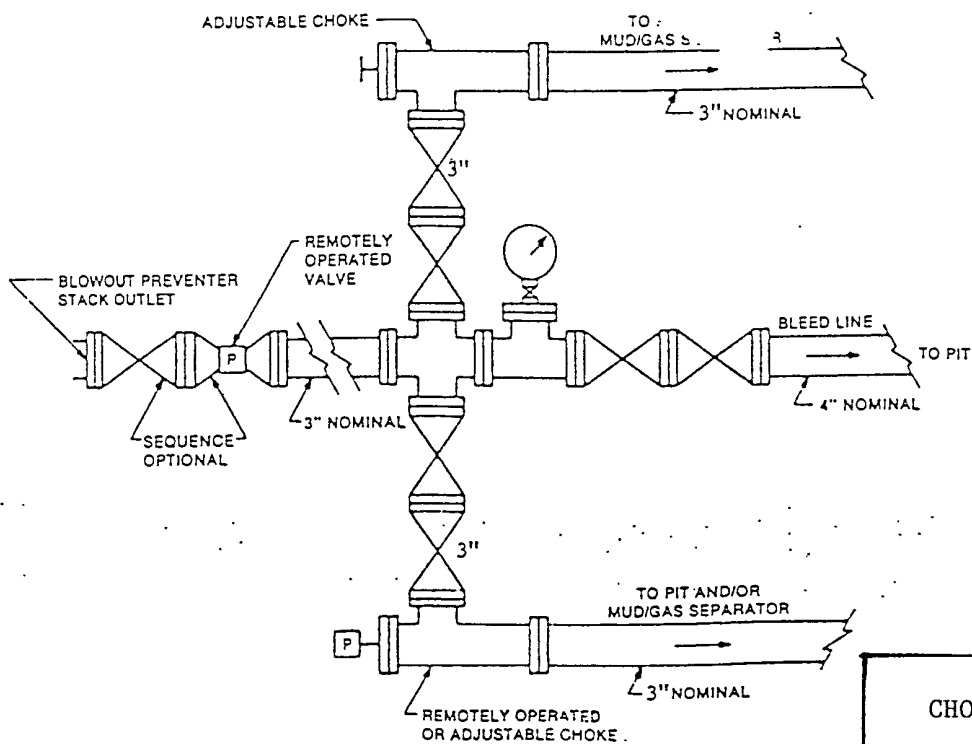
Typical choke manifold assembly for 5MI rated working pressure service — surface installation.
